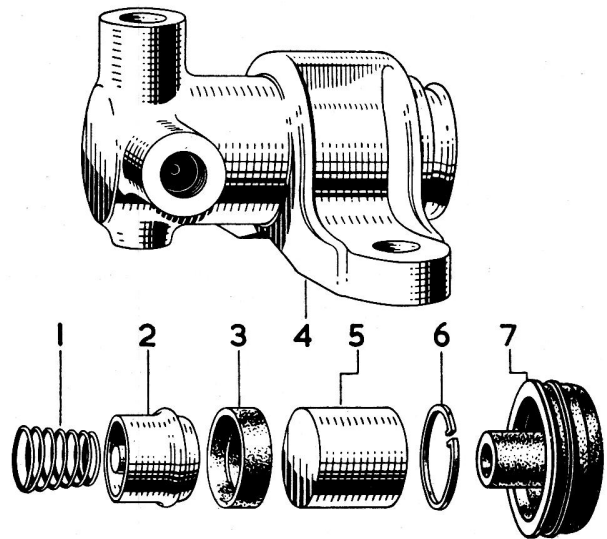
EXPLODED VIEW OF THE CLUTCH SLAVE CYLINDER
